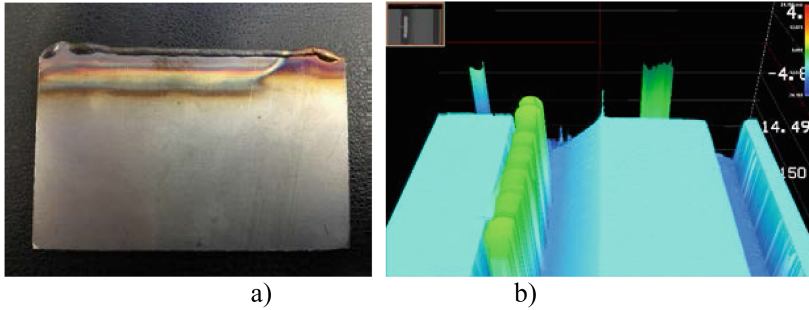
Robotic welding with AVC OFF (a) Flat SS plate, (b) 3D image
